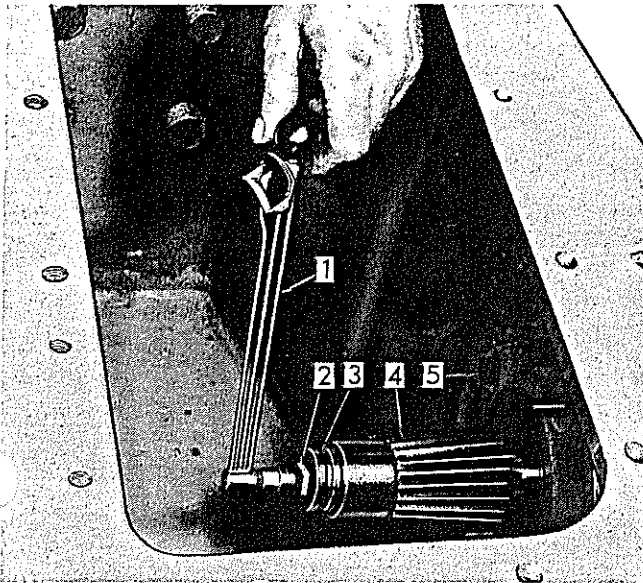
Checking Pre-Load of Bevel Gear Shaft Bearings (T-25732)
